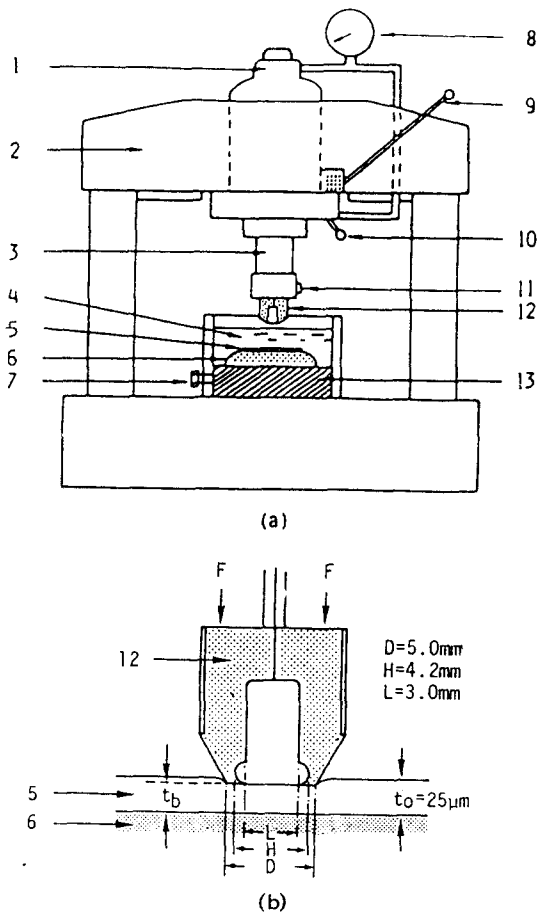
Experimental set-up with hydraulic press and (a), molded plane electrode (b)
